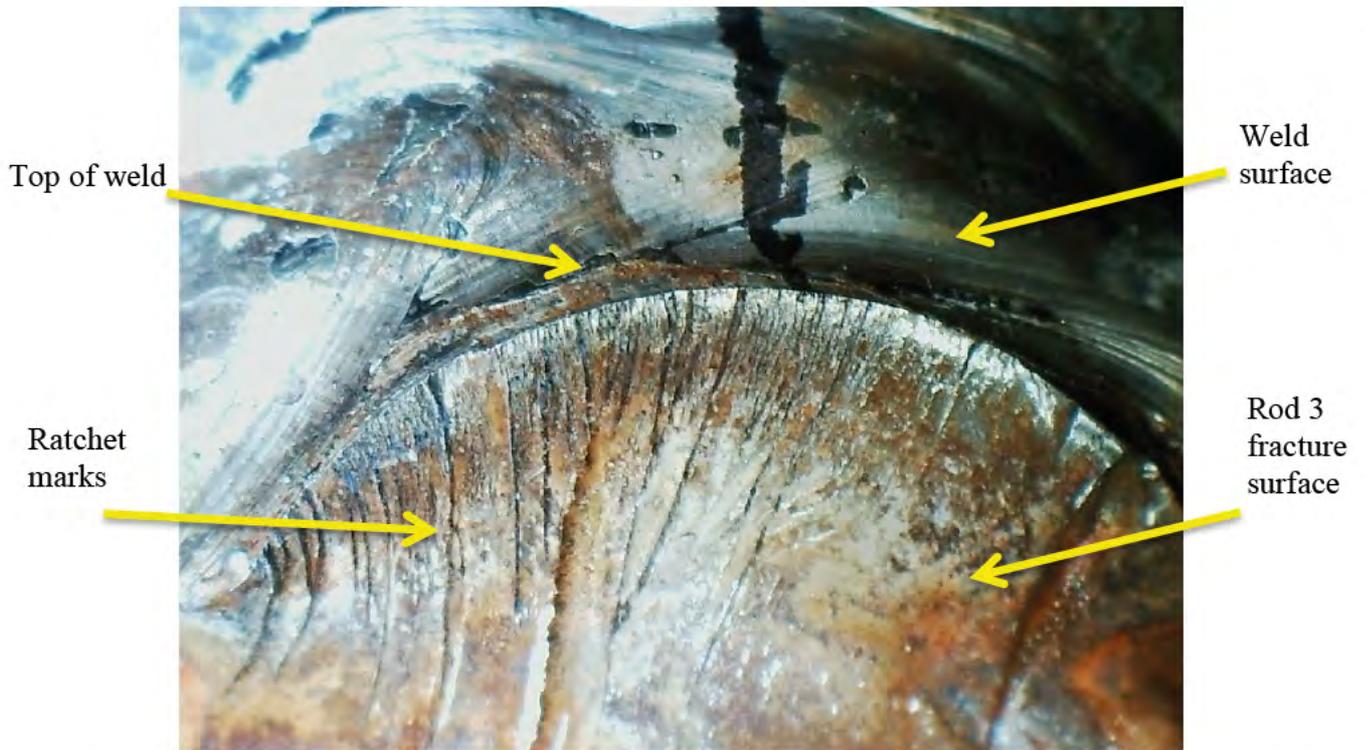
Macroscopic image showing multiple fatigue initiation sites (indicated by the ratchet marks) along edge of fracture at the weld/rod interface on the stbd (outboard) side of position 3.
